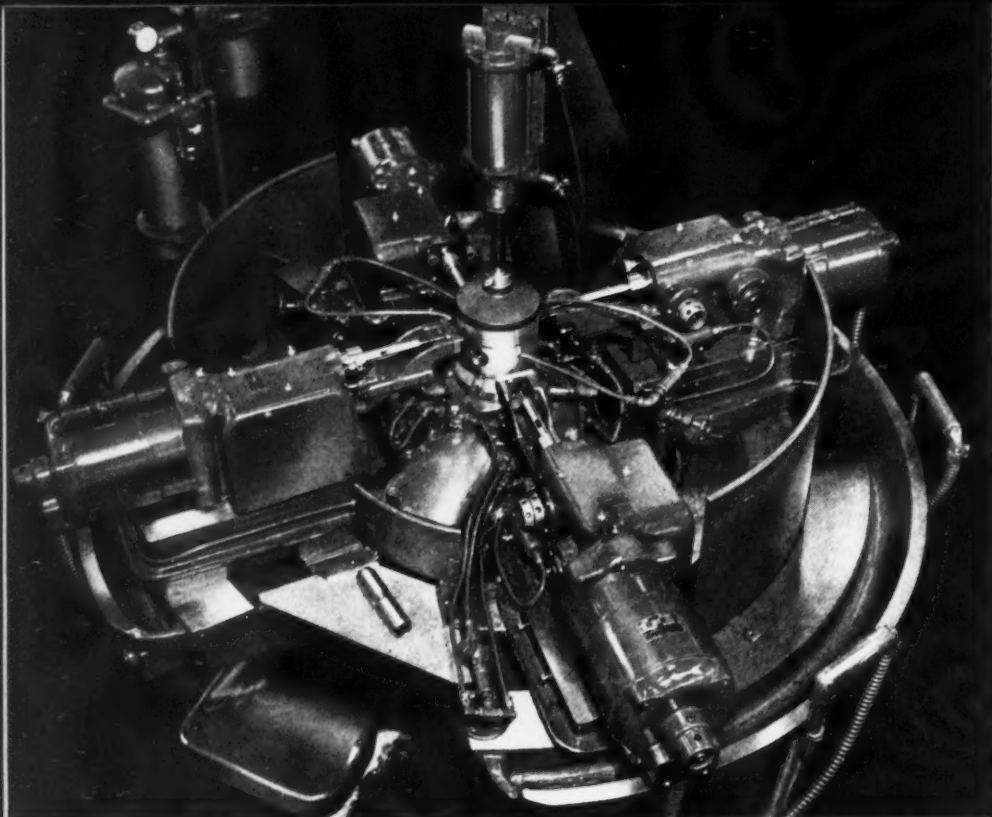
Special Four-head Drilling Machine that Automatically Produces All of the Oil-holes around the Piston Grooves
